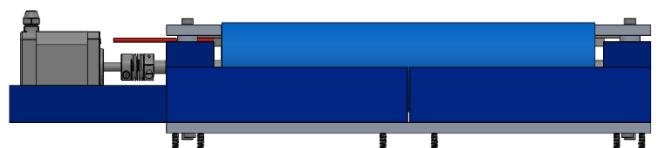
Front-on view of the fully-assembled printer modification assembly.
